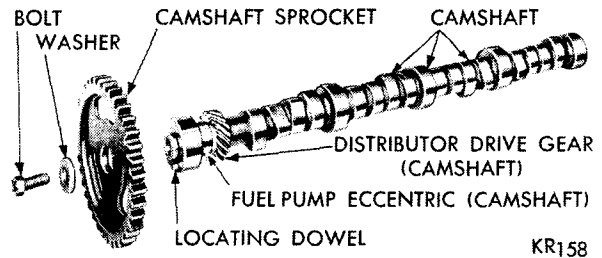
Camshaft and Sprocket Assembly (Disassembled View)
